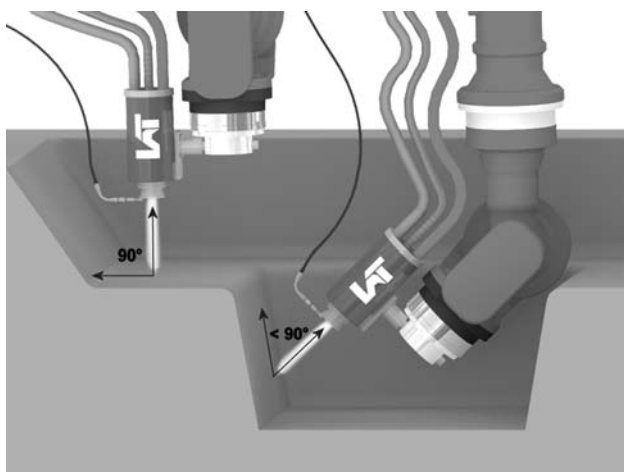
Scheme of a thermal spray process of a deep drawing tool. Some regions with a high geometrical complexity cannot be coated with a perpendicular spray angle
